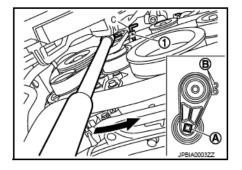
Moving Spinner Handle Courtesy of NISSAN MOTOR CO., U.S.A.
